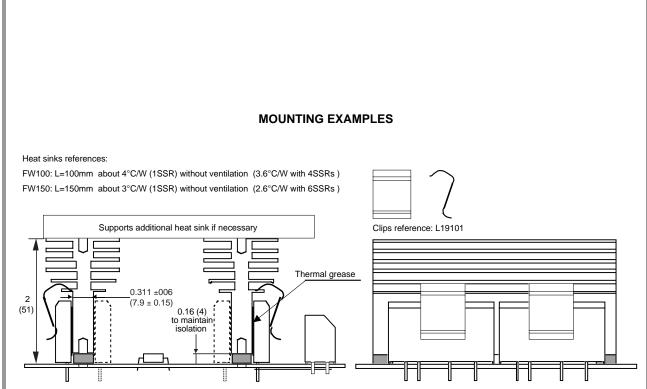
Thermal heat sinks with mounting clips; dimensions in inches (mm)
